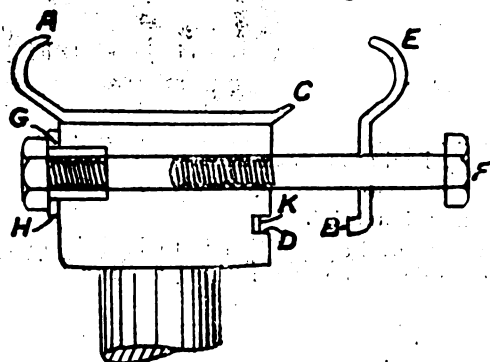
Section of Elastes Detachable-Flange Rim.
